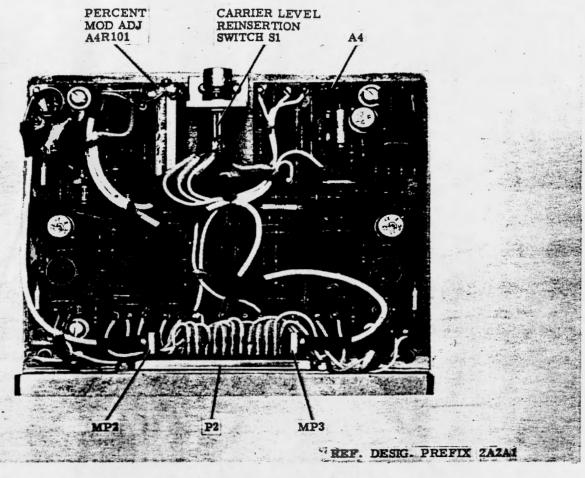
Transmitter 500 CPS Control (Foil Side Up), Component Location
